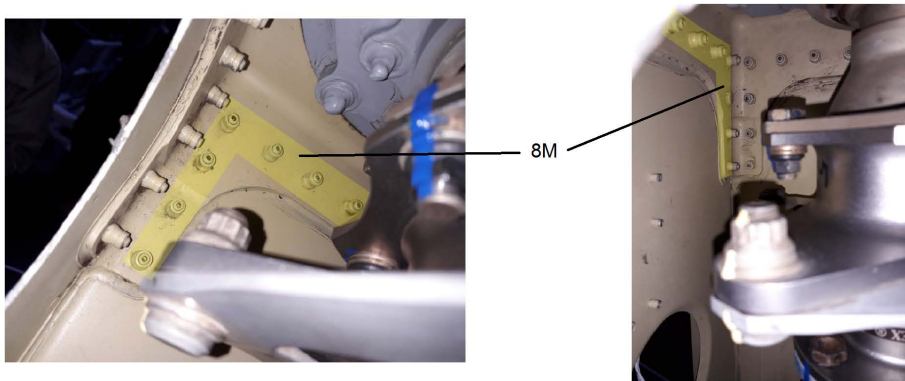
Tail section - Tail gearbox attachment structure - Detailed inspection (Sheet 2 of 5)
